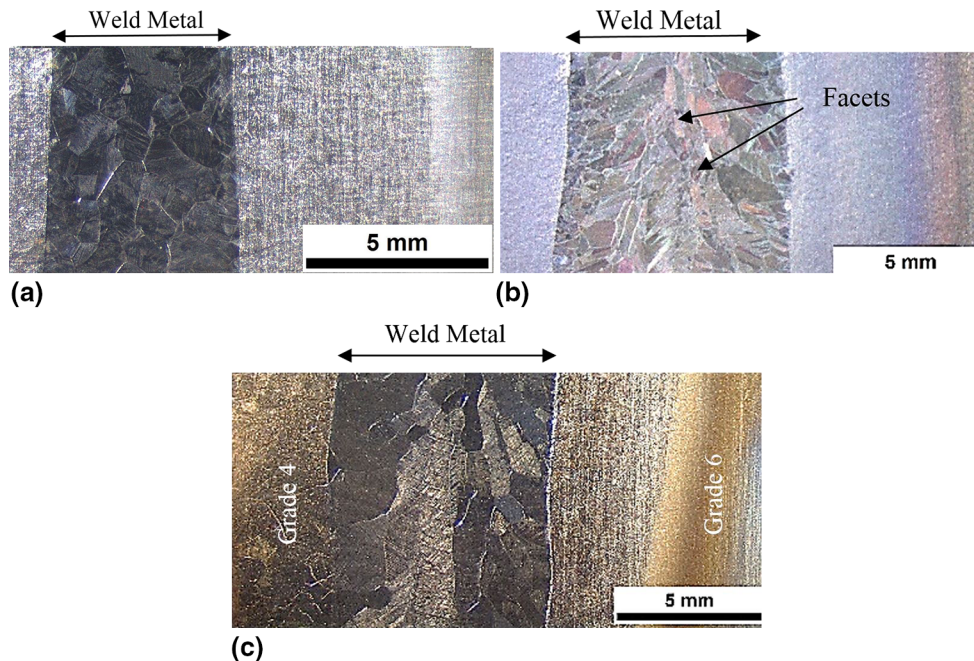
Top surfaces of the as-received titanium alloy thin sheet welds: (a) similar weld of Grade 4, (b) similar weld of Grade 6, and (c) dissimilar weld between Grade 4 and Grade 6
